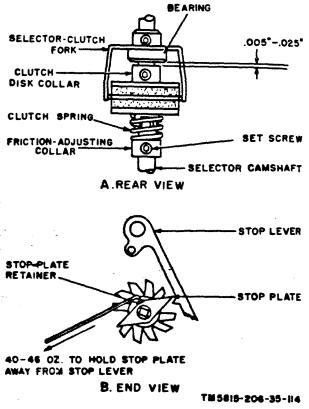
Selector friction-clutch adjustment (TT-4A/TG).
